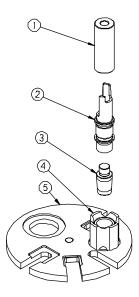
HH46, HH57, HH68 & HH108 Inserting the Valve Guide into the Shock Absorber.
